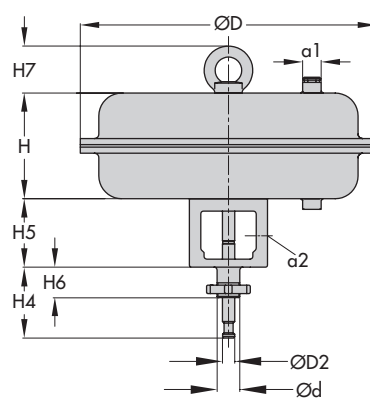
· Type 3277 (700 cm² version with lifting ring)
